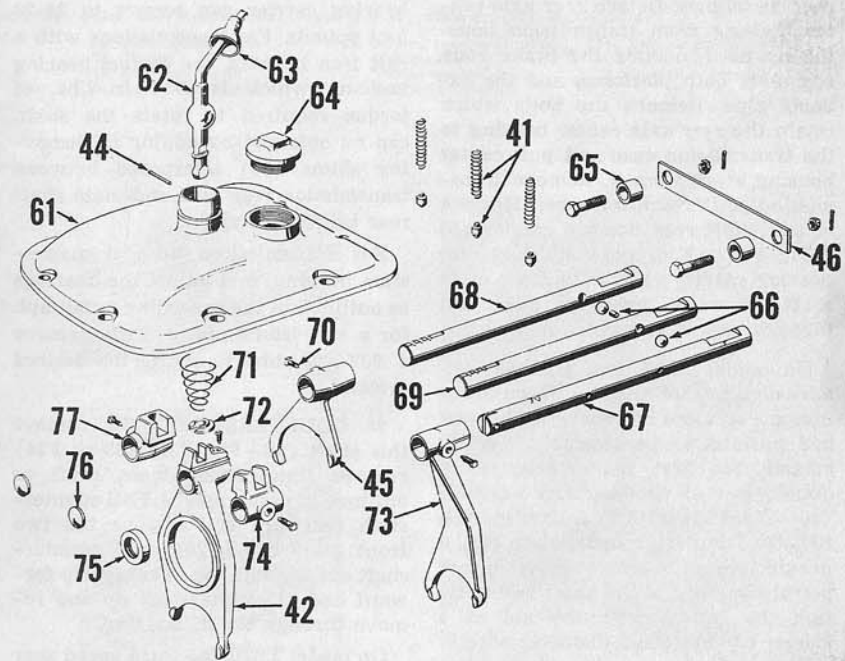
Models TO20, and TO30 transmission cover, shifter rails and forks. Model TE20 is similar except for transmission cover which is integral with the steering gear housing.
